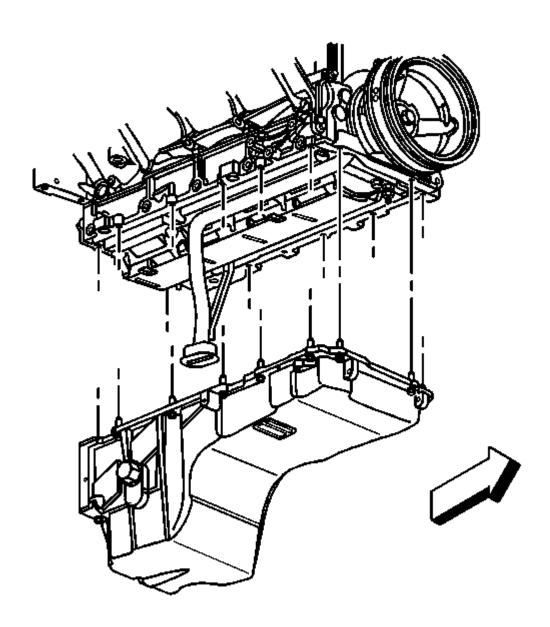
View Of Oil Pan & Bolts Courtesy of GENERAL MOTORS CORP.
